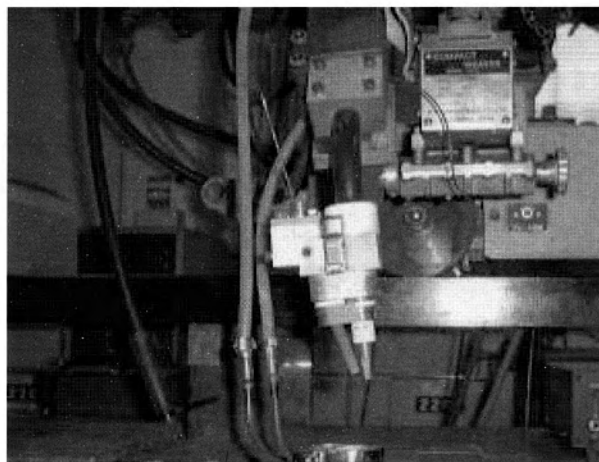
DW MIG Welding equipment DW MIG welding
